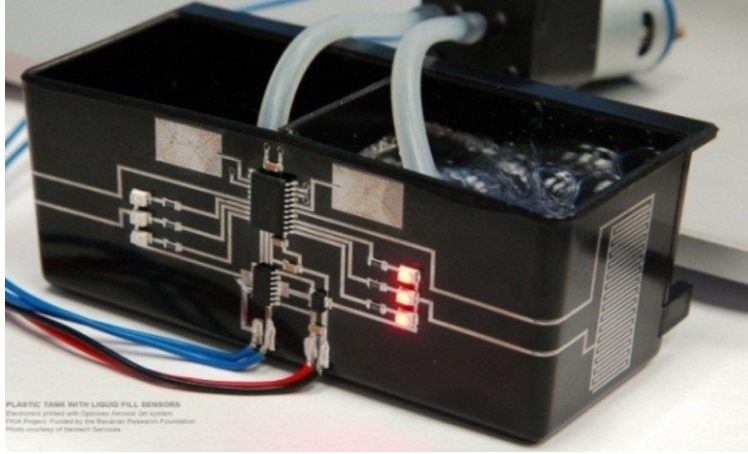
Aerosol jet printed fill level sensor on bucket [3].
